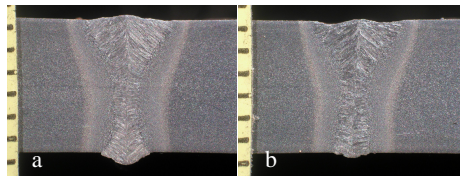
Laser-GMA hybrid welded joint, filler material: Union X96.
